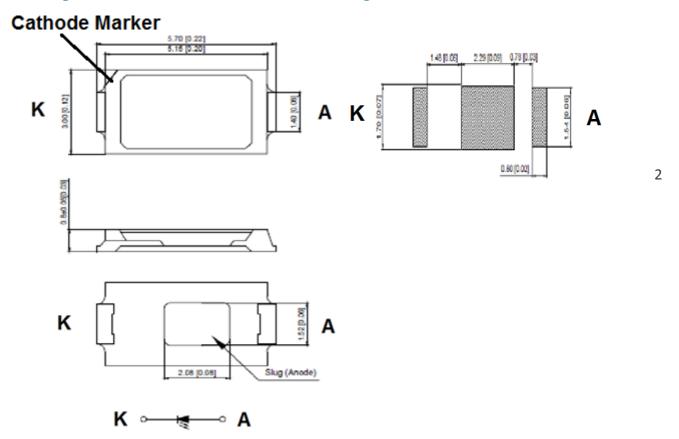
Mechanical Drawing & Soldering Pattern of the 5630 package
